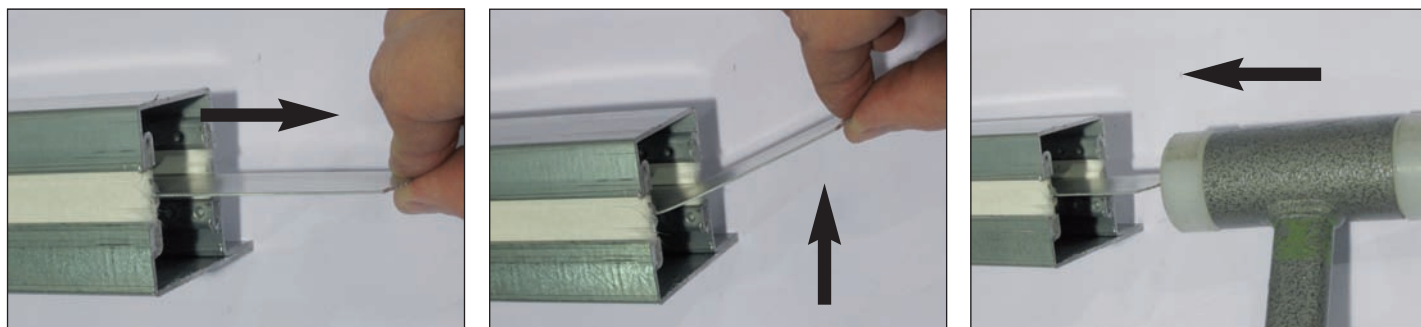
Pull out the aluminium cover plate, bend it slightly and re-insert it using a plastic hammer
